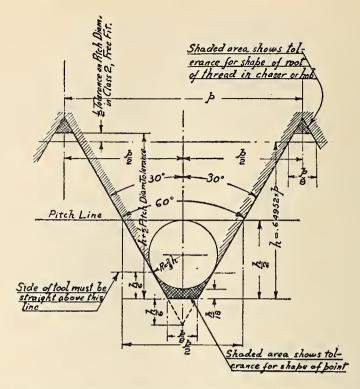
Shape for teeth of chaser or hob not intended to trim crest of thread
